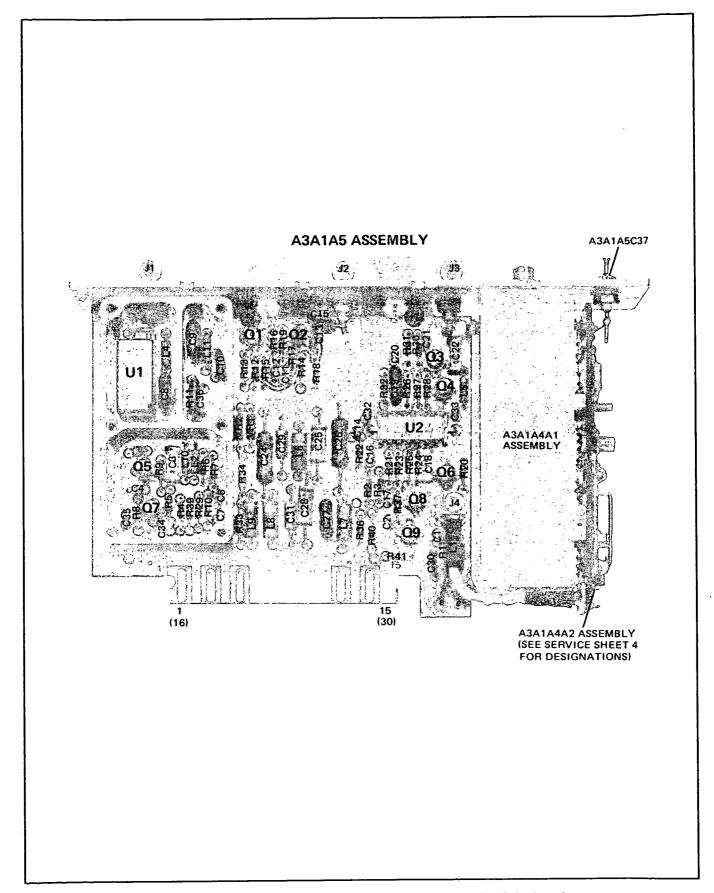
A3A1A5 M/N Output Assembly Component and Test Point Locations
